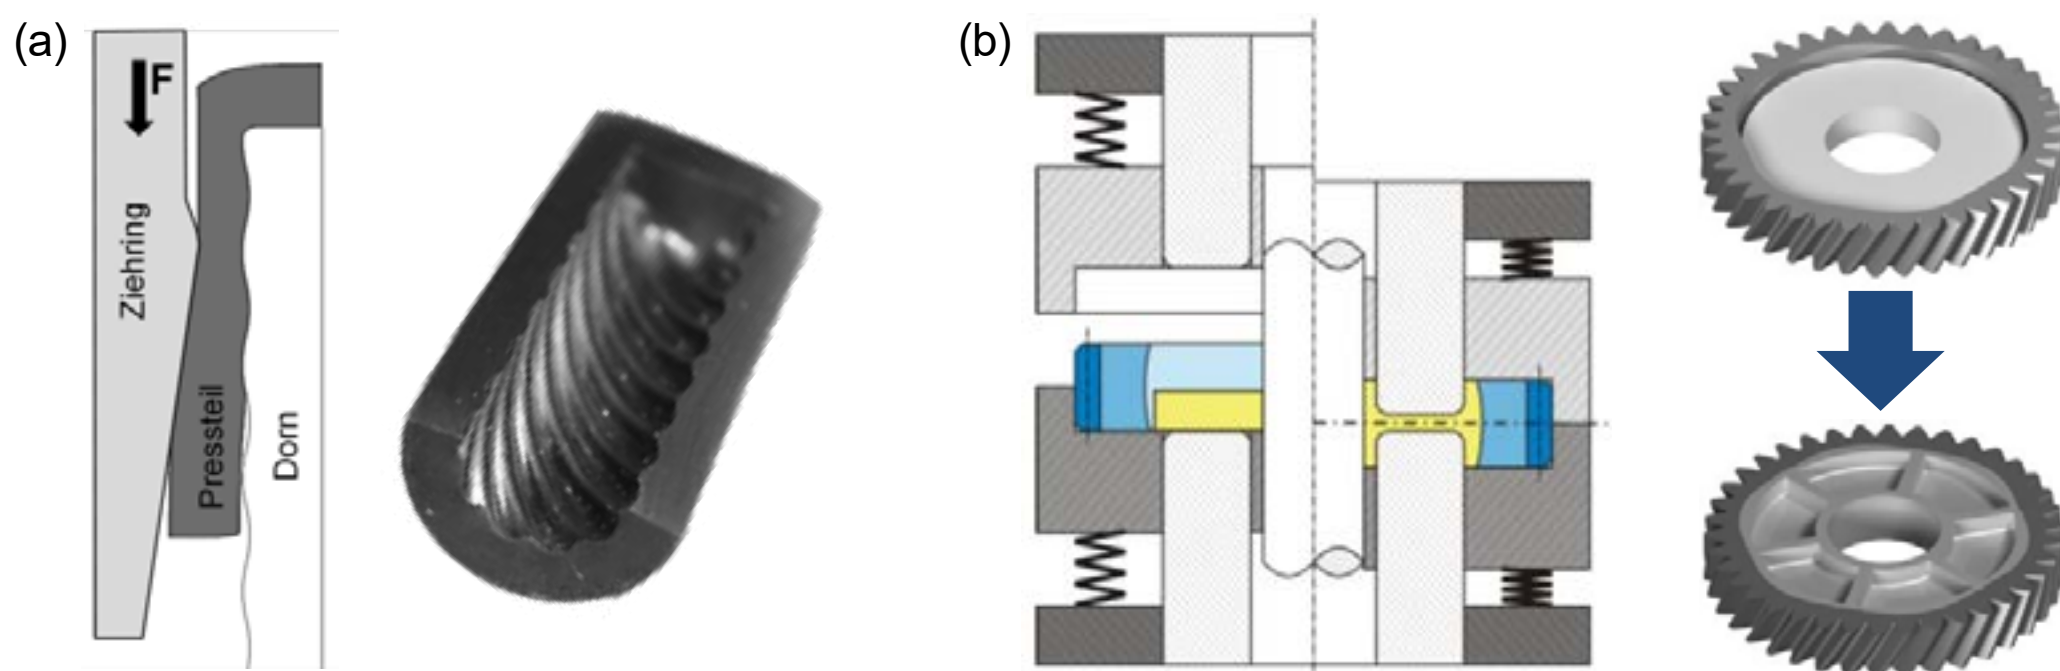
Cold forging of complex internal geometries for piston pins (a) and joining by forming of multicomponent gearwheels (b) [6, 7]
